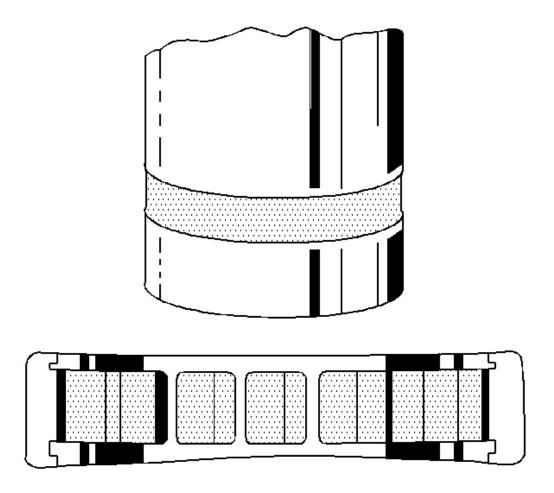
Identifying Major Wear Courtesy of GENERAL MOTORS CORP.
